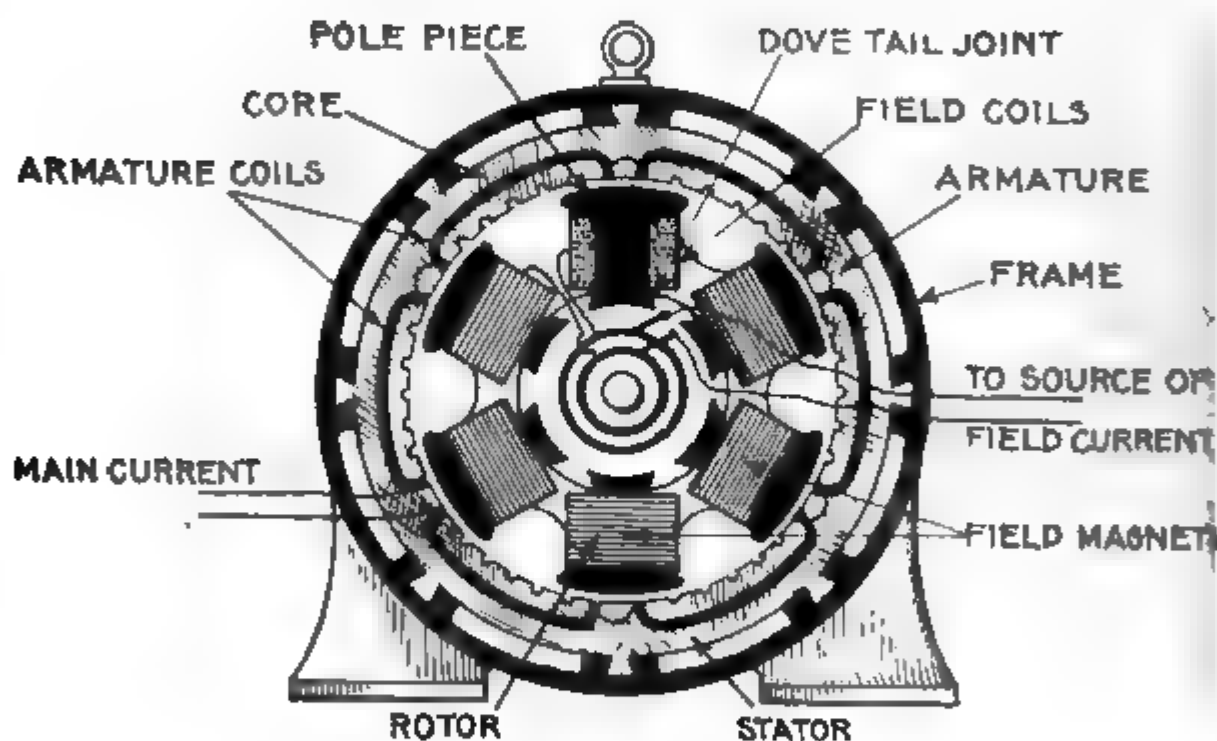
,394.—Diagram showing essential parts of a revolving field alternator and method of joining the parts in assembling.
